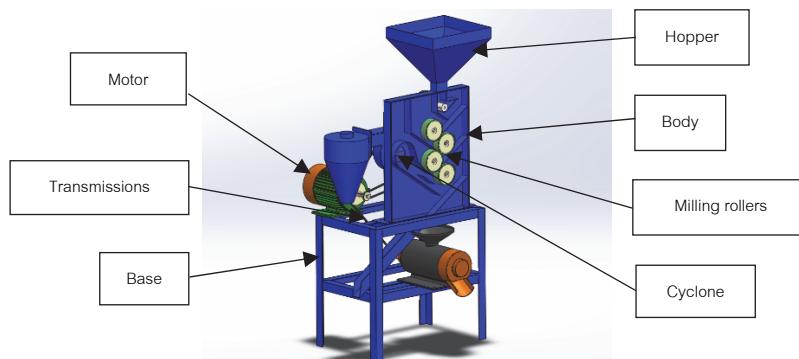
Small brown rice milling machine by using 4 rubber rollers.
